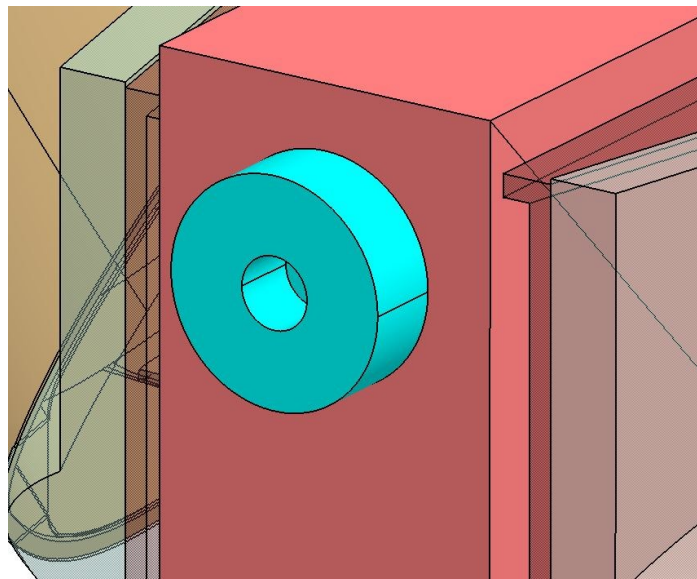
Example of a male-type datum machined on a metal bung
